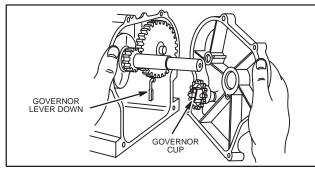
SHOWING GOVERNOR CRANK PROPER POSITION
